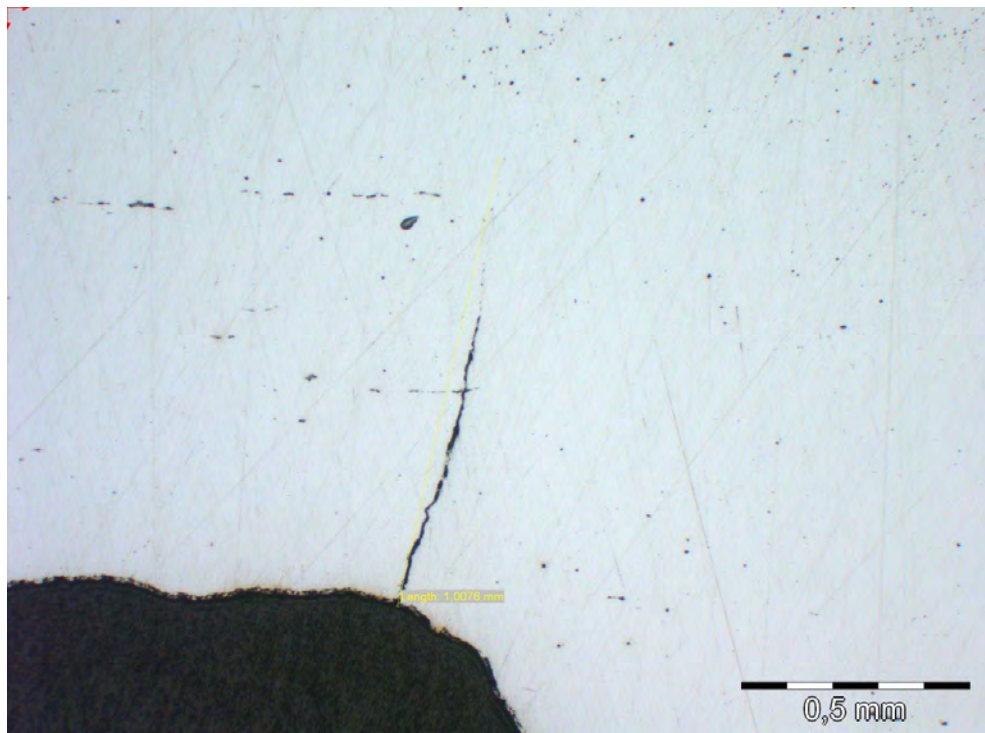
Crack at segment B, first ridge on barrel no. SFK 0120-A
